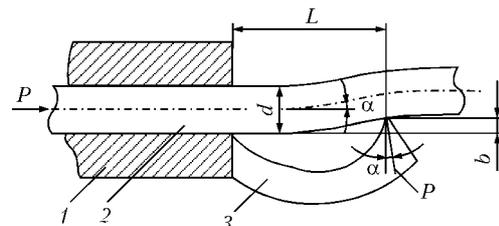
Schematic of contact in tip-wire system: 1 — tip tubular part; 2 — electrode wire; 3 — tip arm
